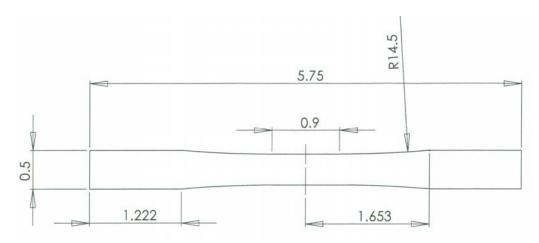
Tension and Fatigue Test Specimen Geometry (Courtesy of TRL)
